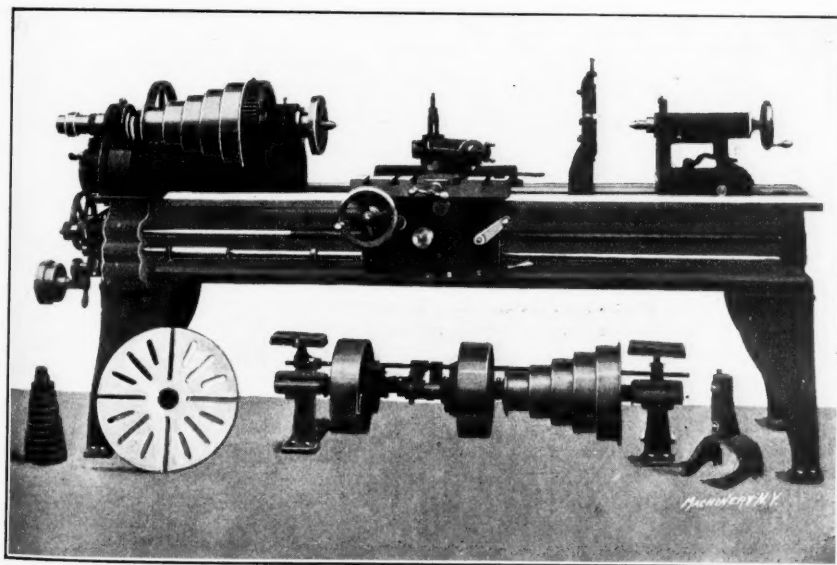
Eighteen-inch Lathe built by Silk, Anderson Co.
